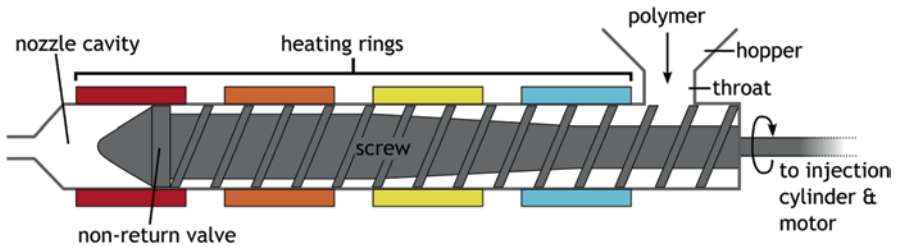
Schematic diagram of a typical injection moulding machine's barrel
